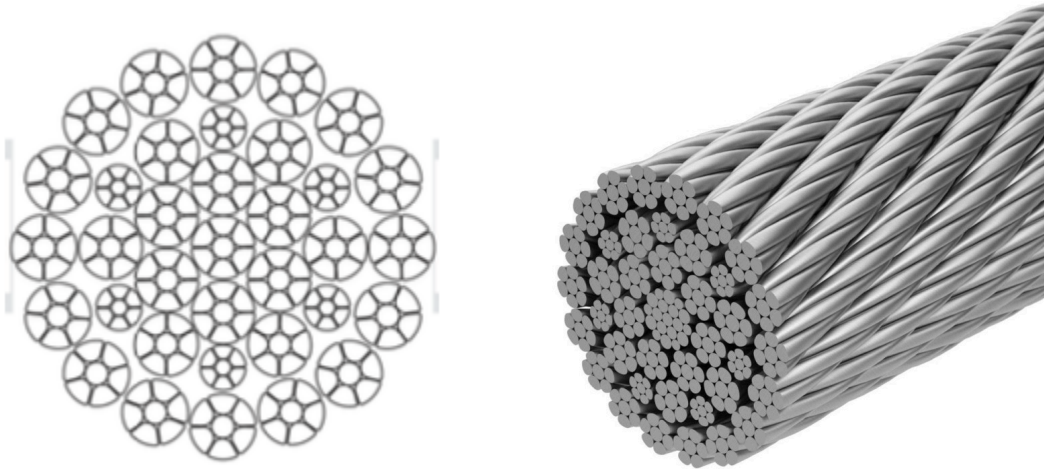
Cross section view (left) and perspective view (right) of the steel anti-torsion cable used in Renewell's Gravity Well.
